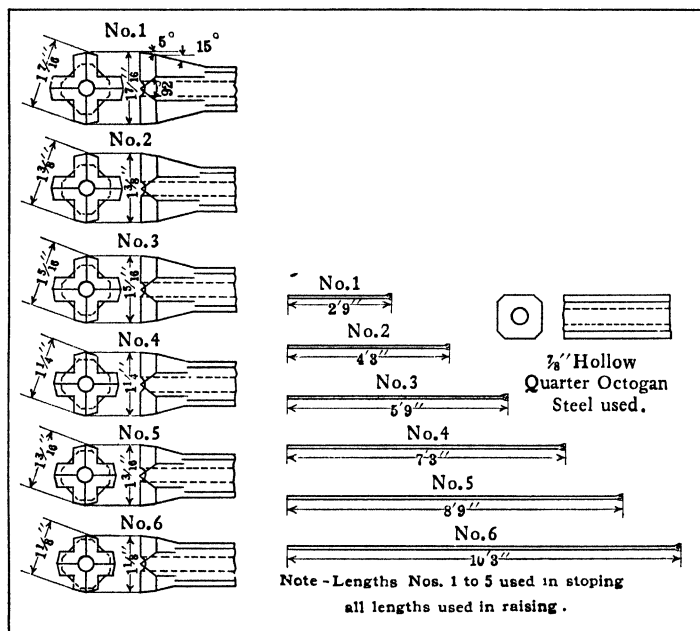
DRILL STEEL FOR STOPES AND RAISES, SHOWING DRILL LENGTHS AND BITS USED.
